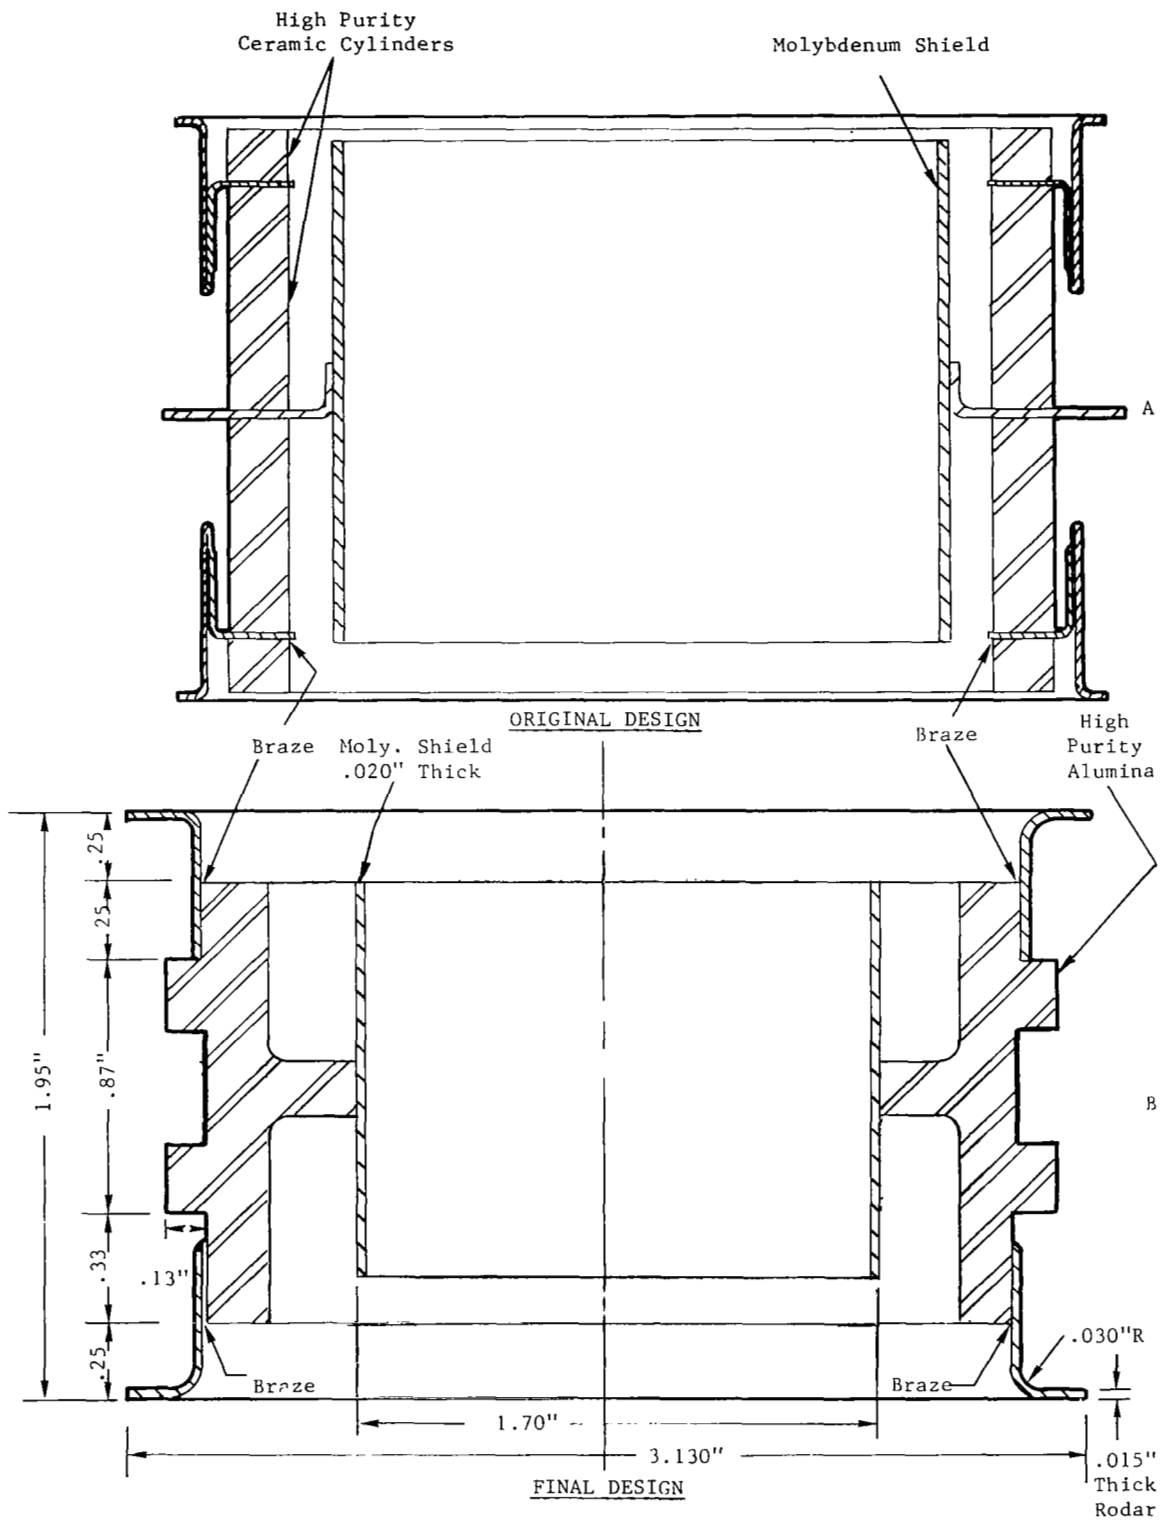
Cross Section Layout of Contact Capsule Ceramic Assembly.
